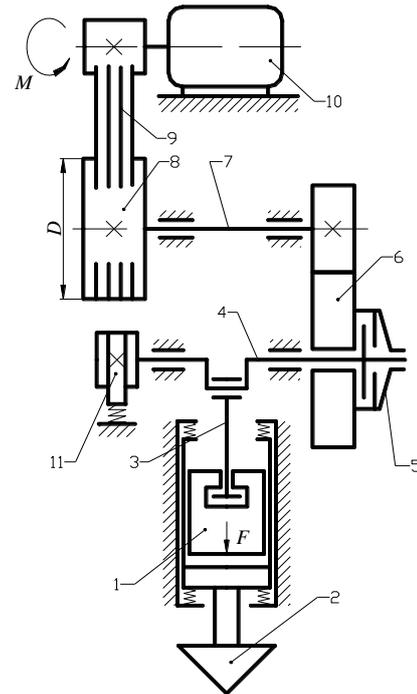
Crank drive: 1- output drive link; 2- working body; 3- connecting rod; 4- crankshaft; 5- coupling; 6- gear transmission; 7- shaft; 8- flywheel; 9- V-belt transmission; 10- engine; 11- brake
